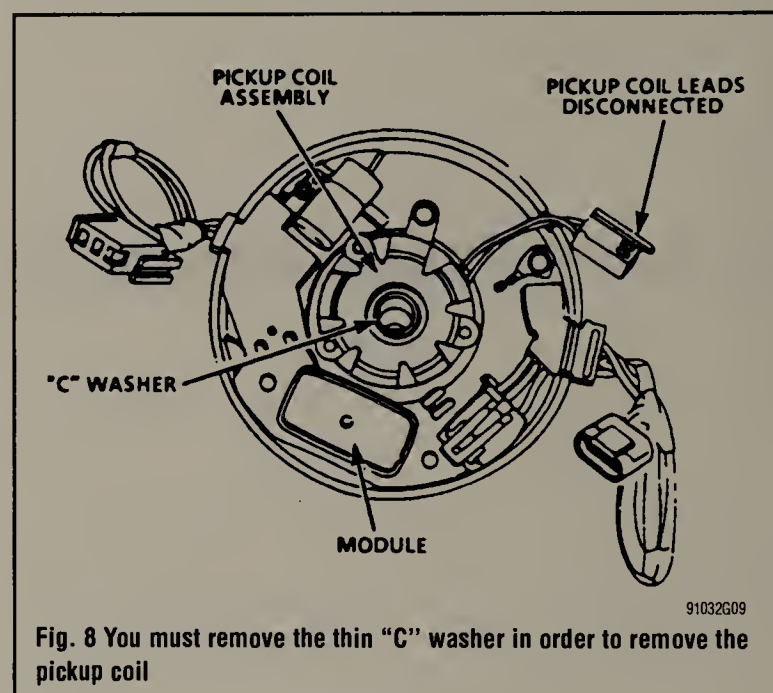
You must remove the thin "C" washer in order to remove the pickup coil
